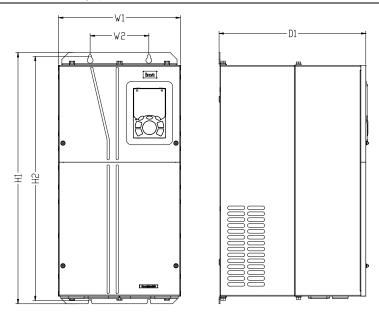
Wall installation diagram of VFDs of 220V 18.5-55kW and 460V 37-55kW
